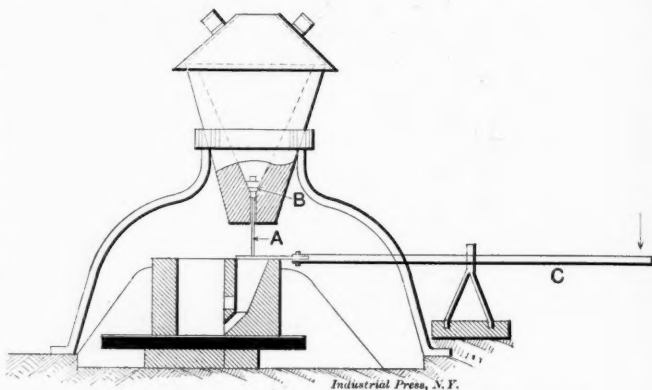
Typical Form of Crucible used for Thermit Welding and Casting.
